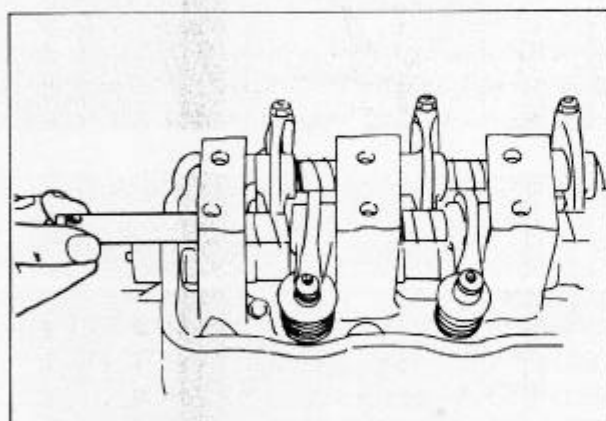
A-42 REMOVAL ROCKER ARM SHAFT
